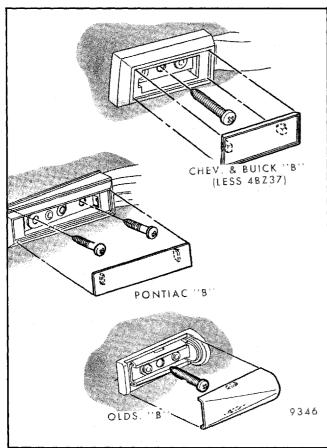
Typical Door Pull Handle Attachment - B Styles
